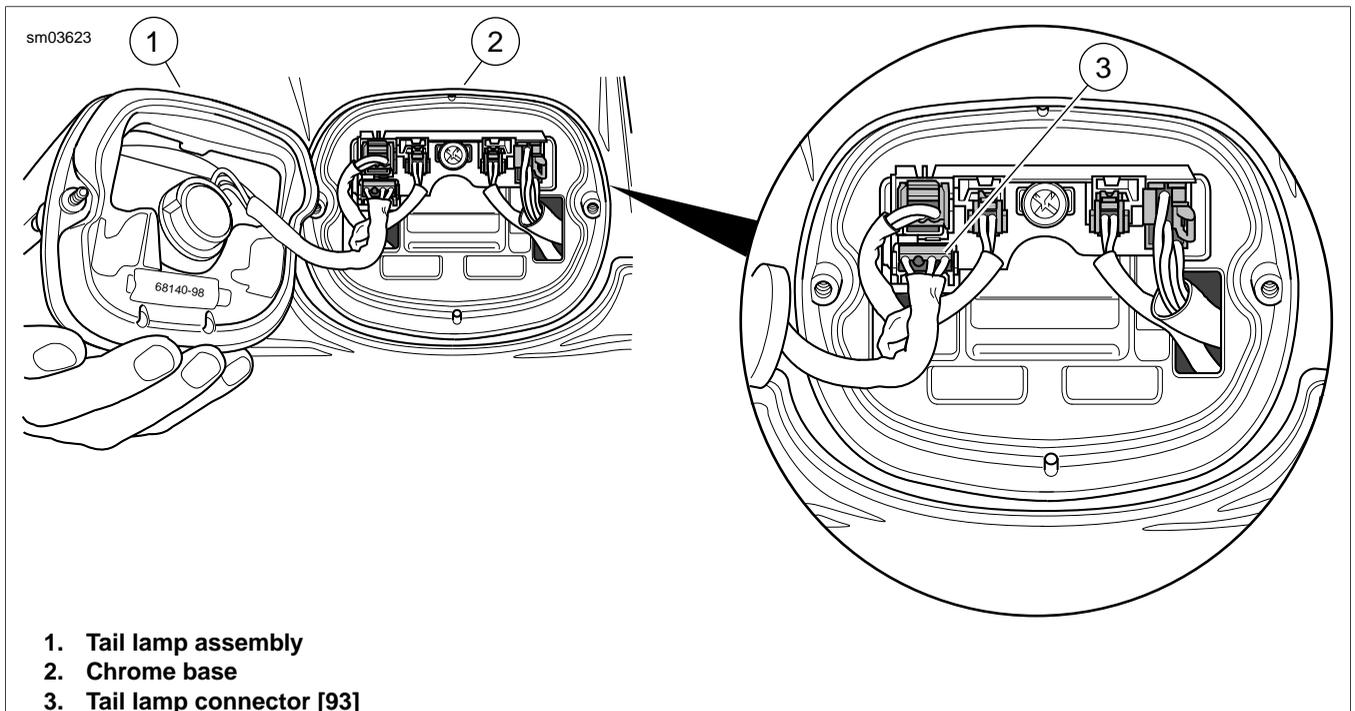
Remove Tail Lamp and Depress Button to Release Socket Housing
